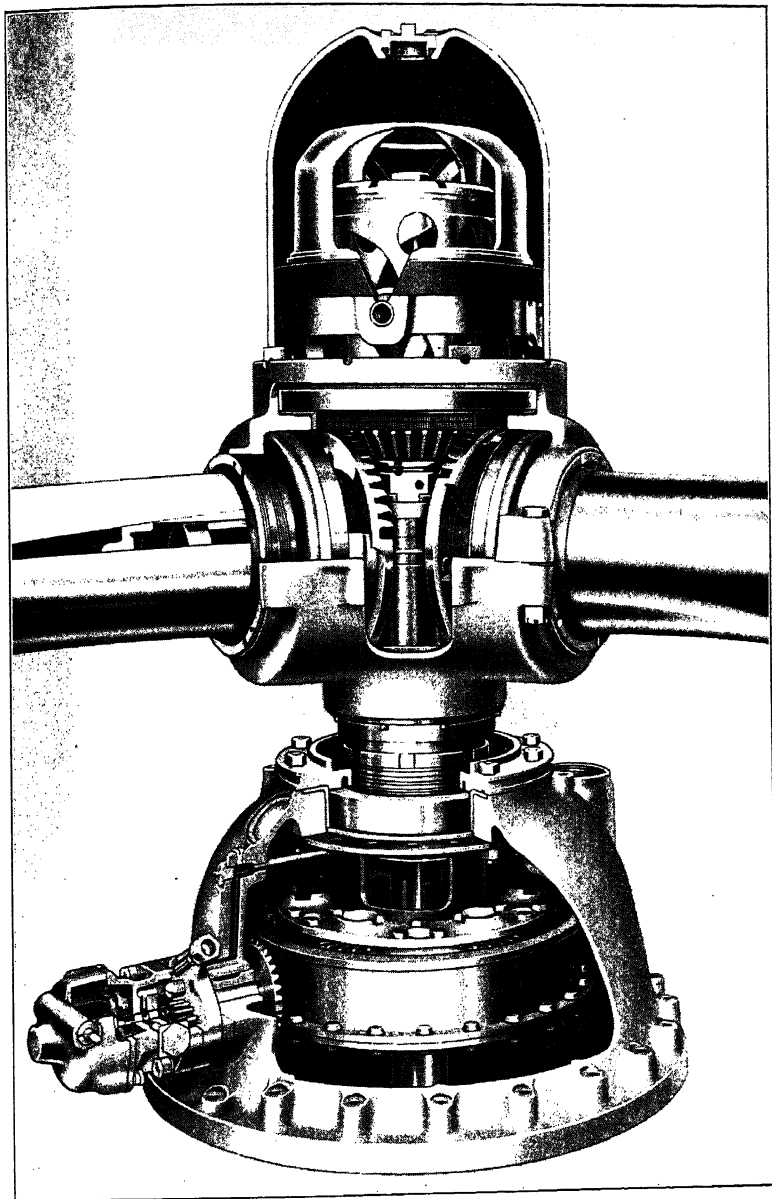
Hamilton Standard Hydromatic assembly. (Courtesy Hamilton Standard Division, United Aircraft Corp.)
